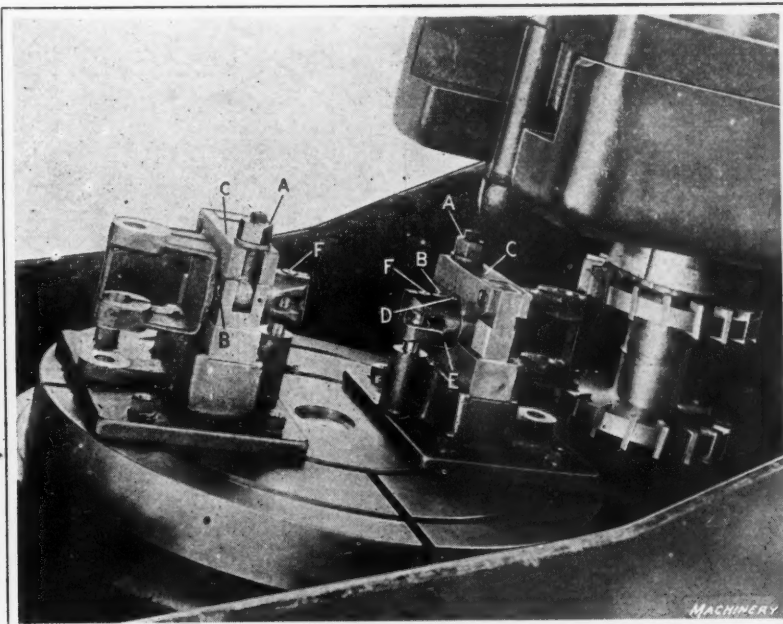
Straddle-milling Yoke Forgings on "Ohio" Tilted Rotary Milling Machine operated on Indexing Principle
